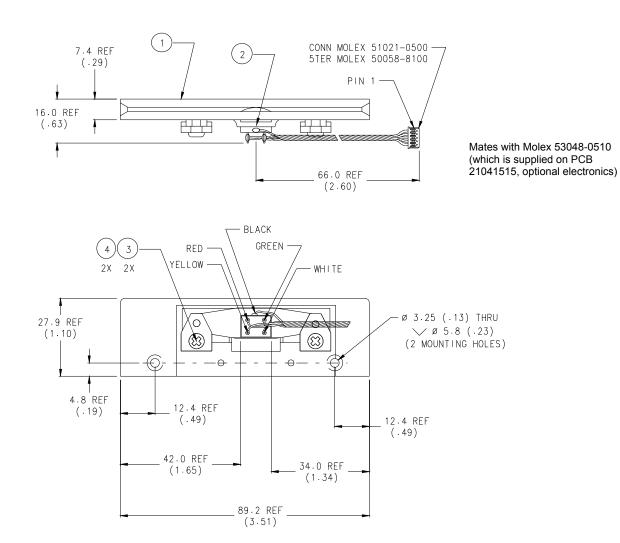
Reader Mounting Dimensions, Tracks 1 and 2
